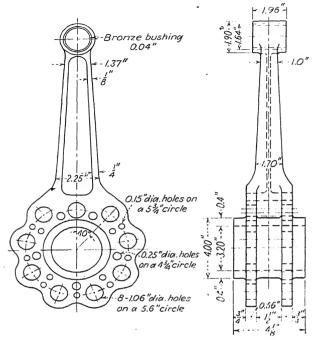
Master connecting rod used in the Wright 1820 Cyclone engine.
